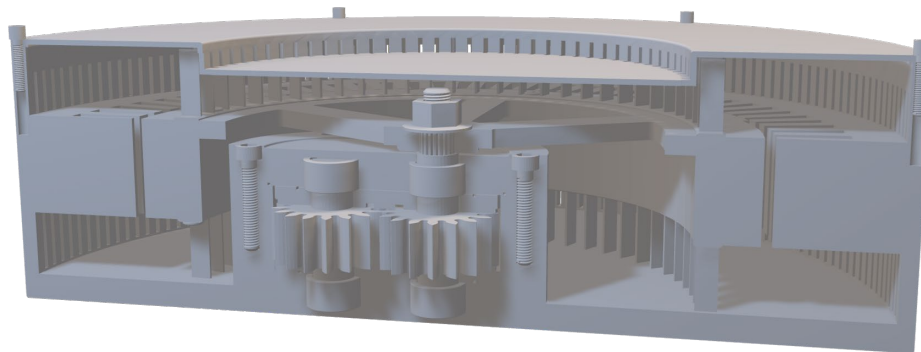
Computer-aided design image of the integrated external gear machine and electric machine (1st generation prototype)
